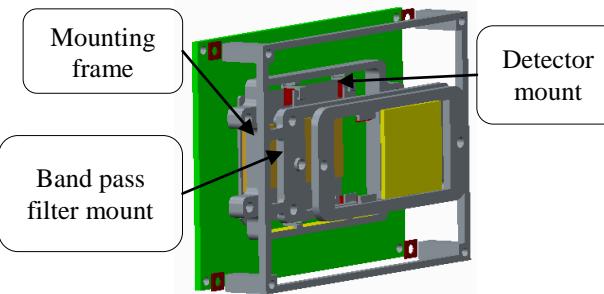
Design- II showing mount frame with rectangular rim for interface
